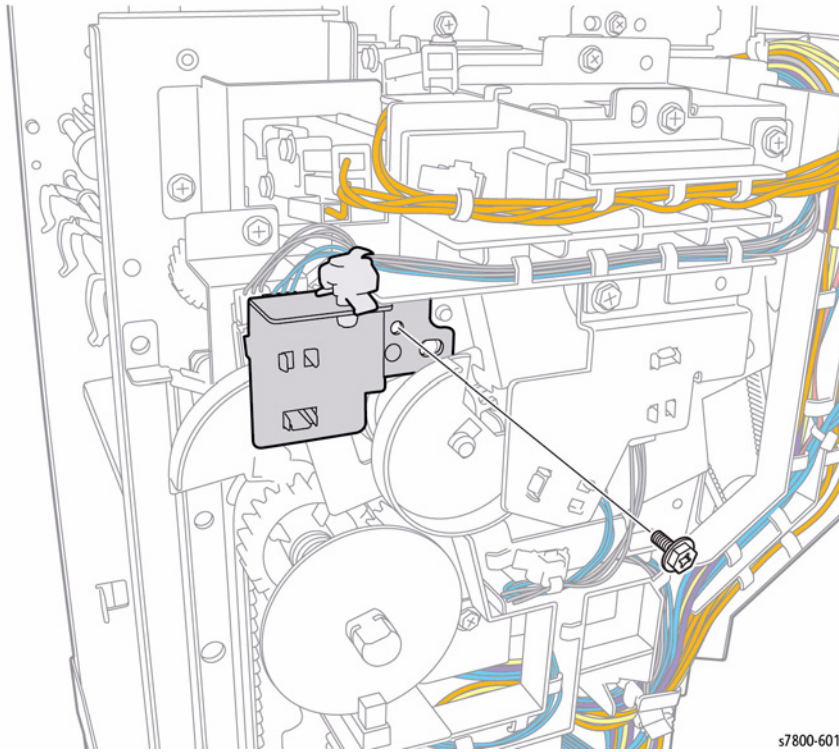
Removing the Stacker Height Sensor 2 with Bracket
